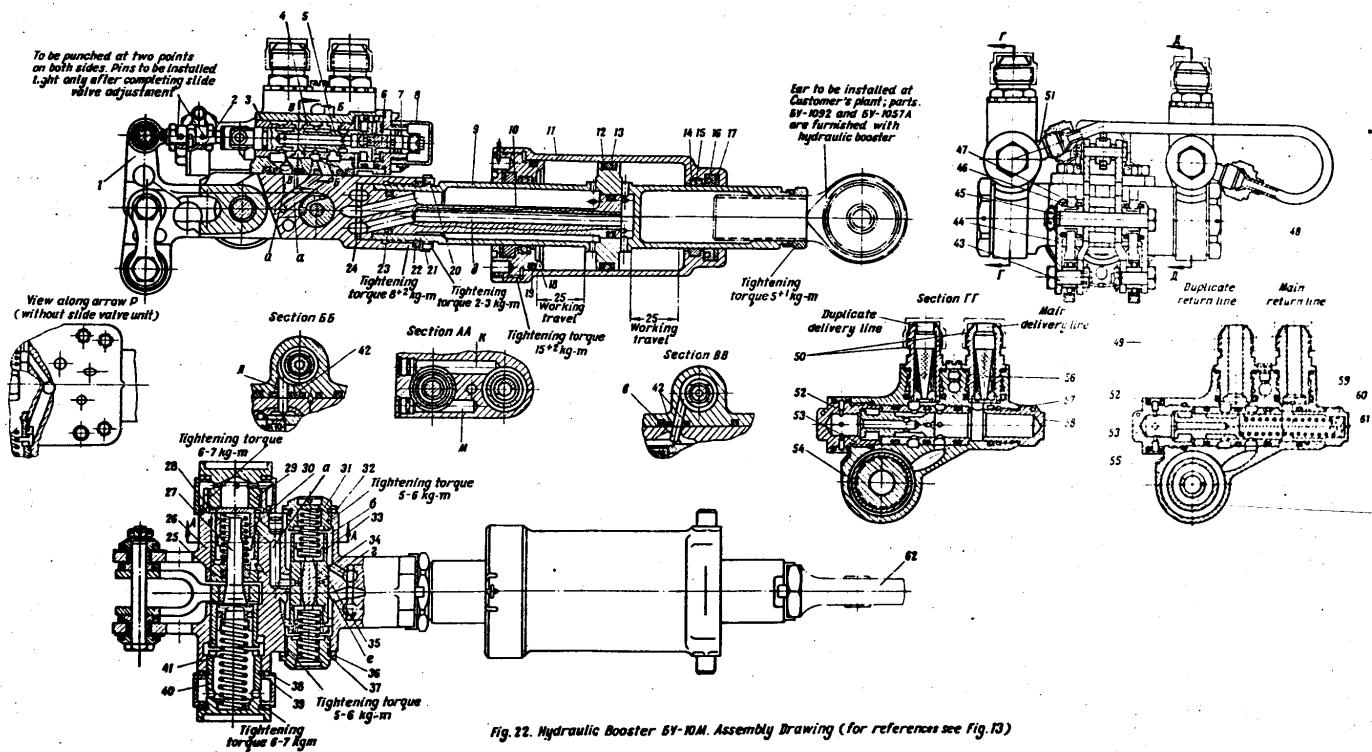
Hydraulic Booster BY-10M. Assembly Drawing (for references see Fig. 13)
